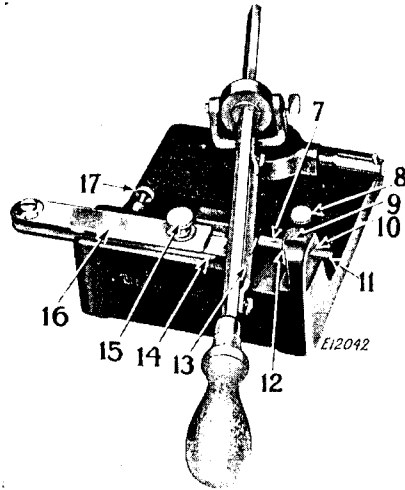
Knife Hone 259283 with Knife in Position Ready to Sharpen
